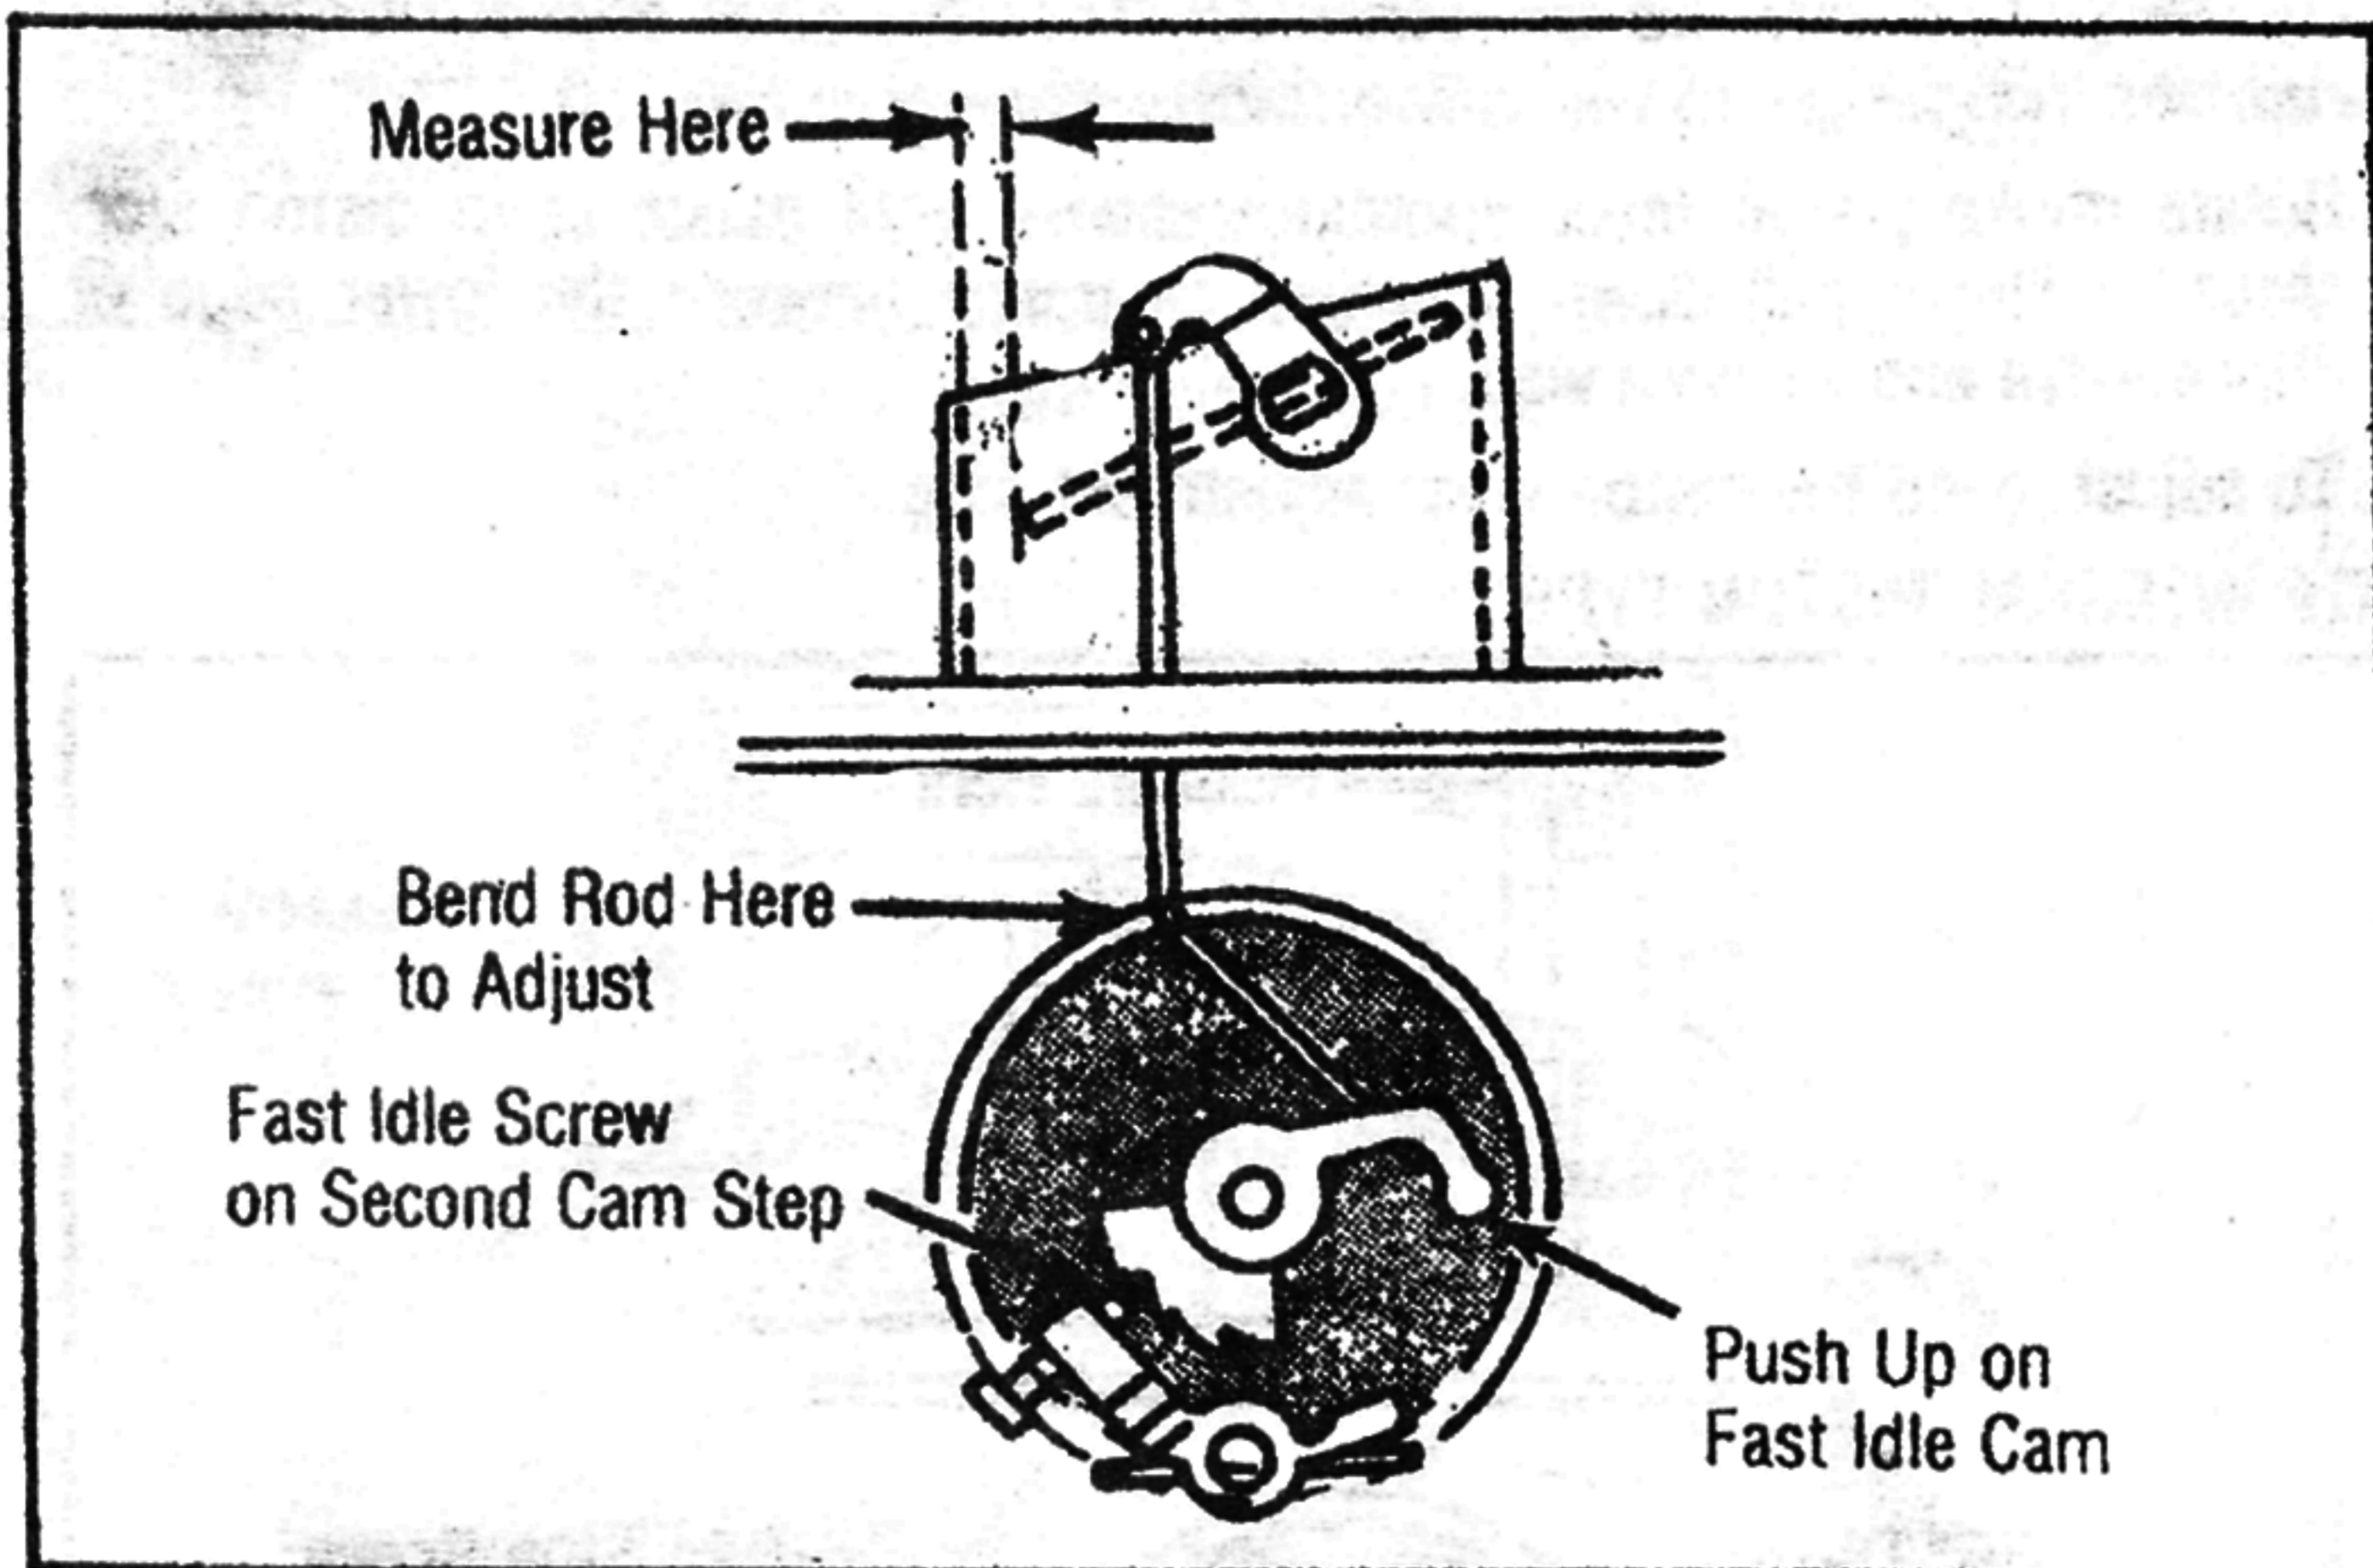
Fast Idle Cam Adjustment (Integral Choke Models)
